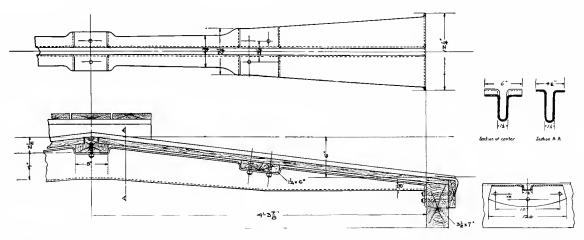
Cleveland Type B Pressed Steel Carline with Wide Ends. Cleveland Car Specialty Company.
